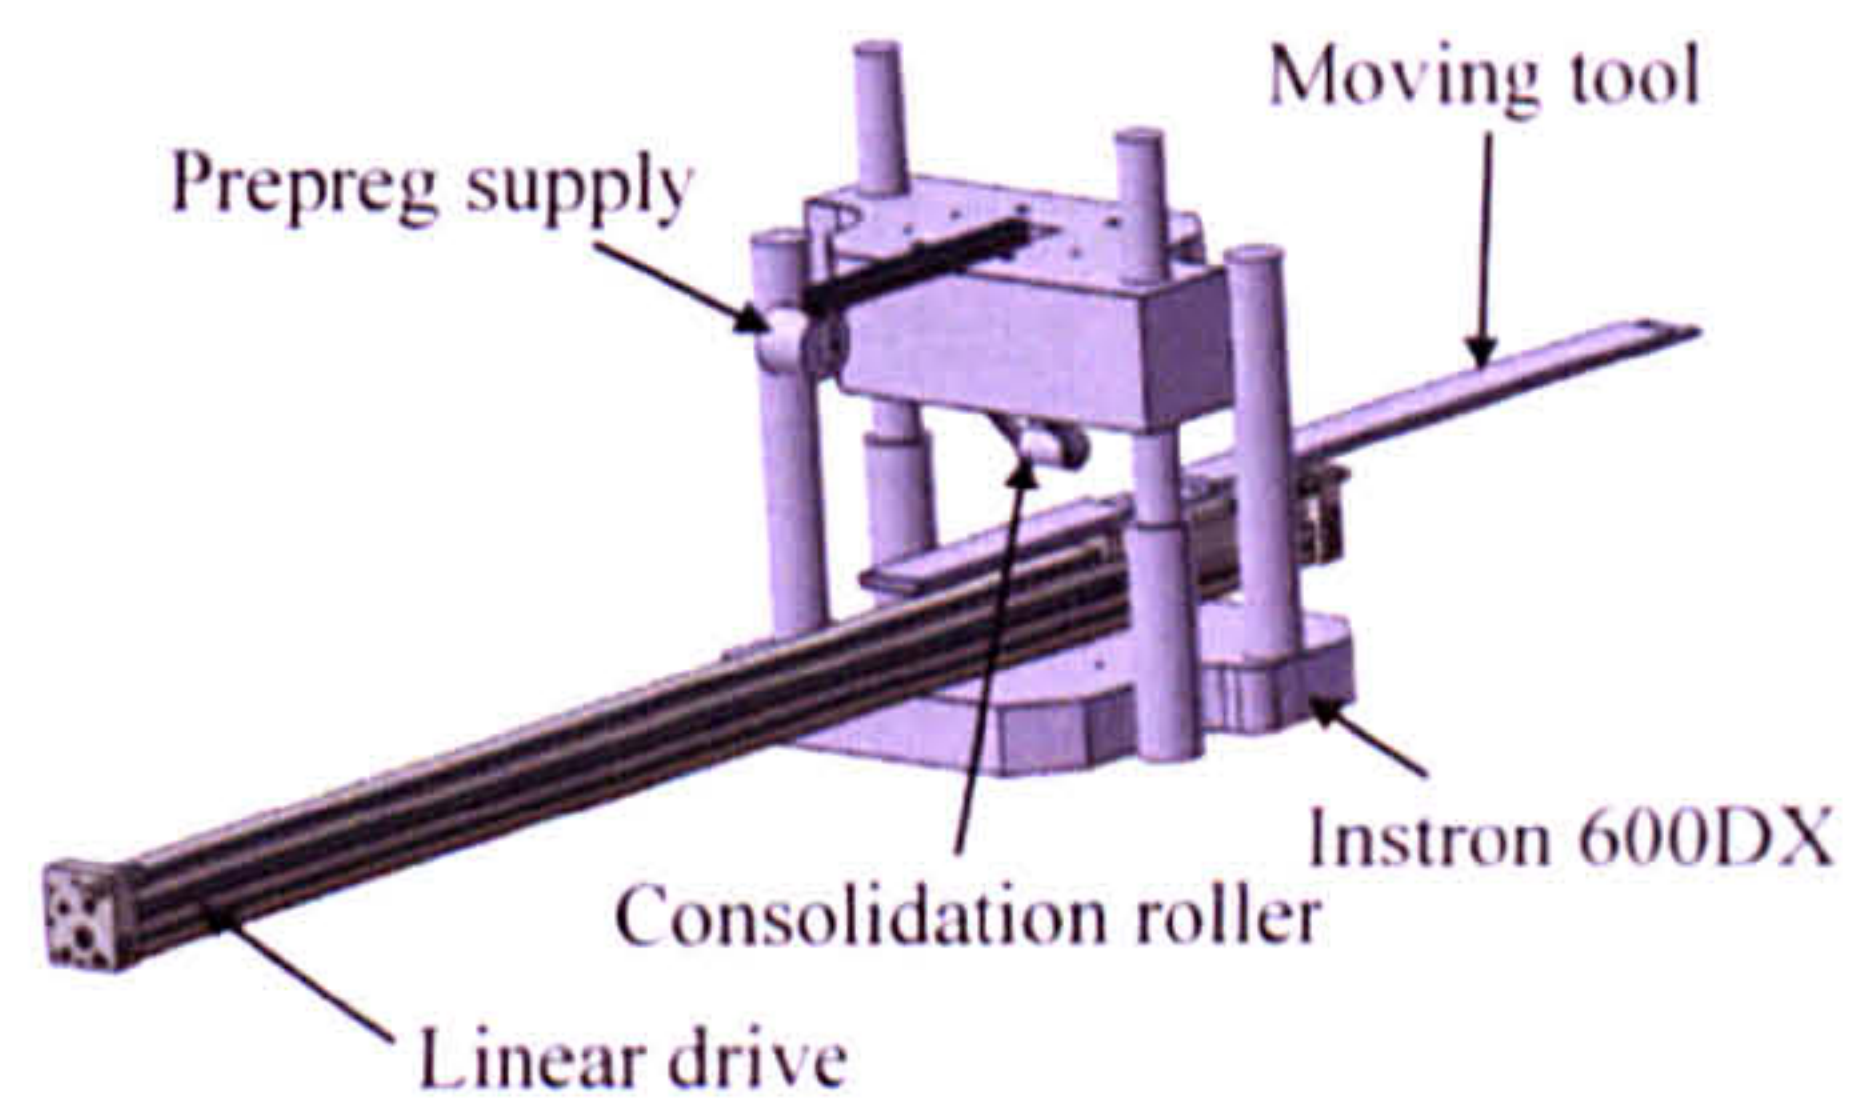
Drawing of a moving tool concept in the compression section of the Instron 600DX.
